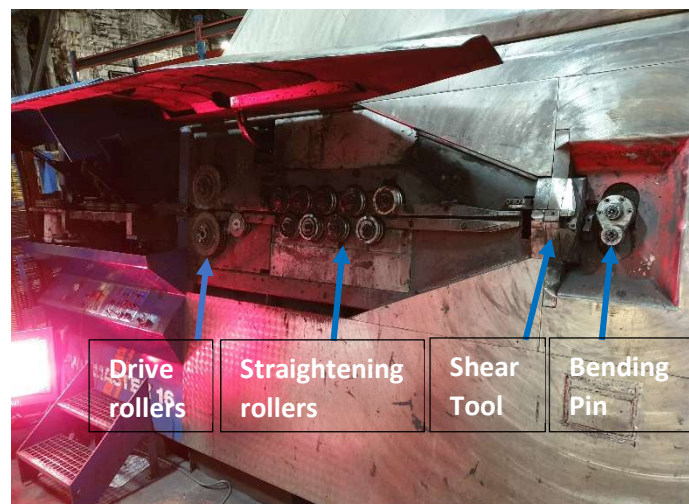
ALB machine with the cover raised, showing the drive roller pair, a set of straightening rollers, bending pin, and shearing tool. Rebar enters the machine from the left and the finished product will drop to the right of the image after shearing.
